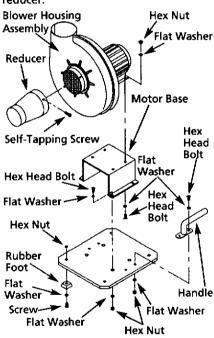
Mounting Rubber Feet, Motor Base, Blower Housing and Reducer
